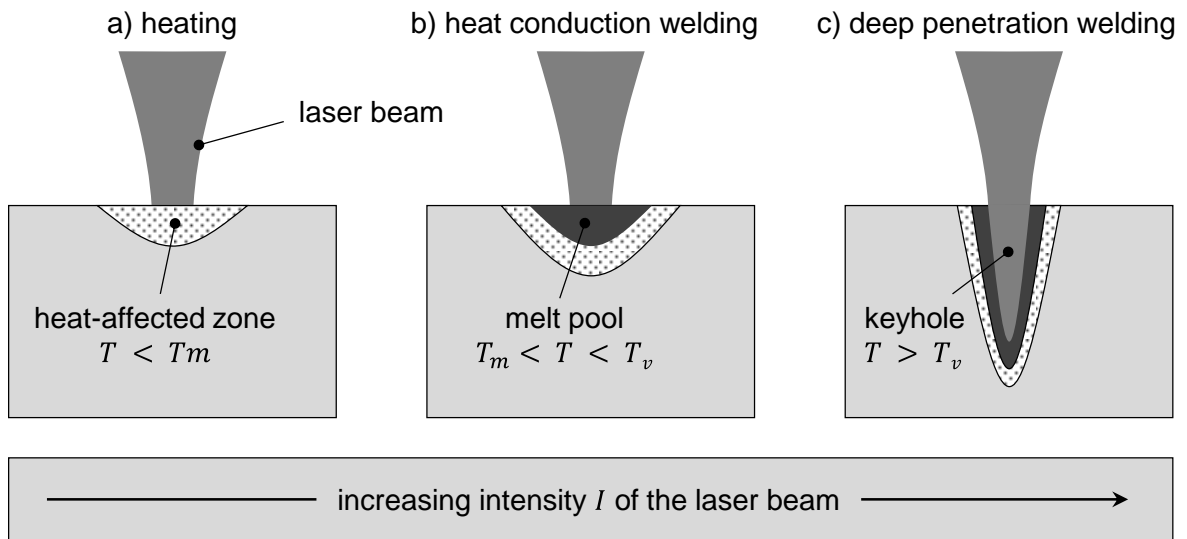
Process regimes of laser beam welding for an increasing radiation intensity; a) heating; b) heat conduction welding; c) deep penetration welding; based on KATAYAMA (2020, p. 25)
